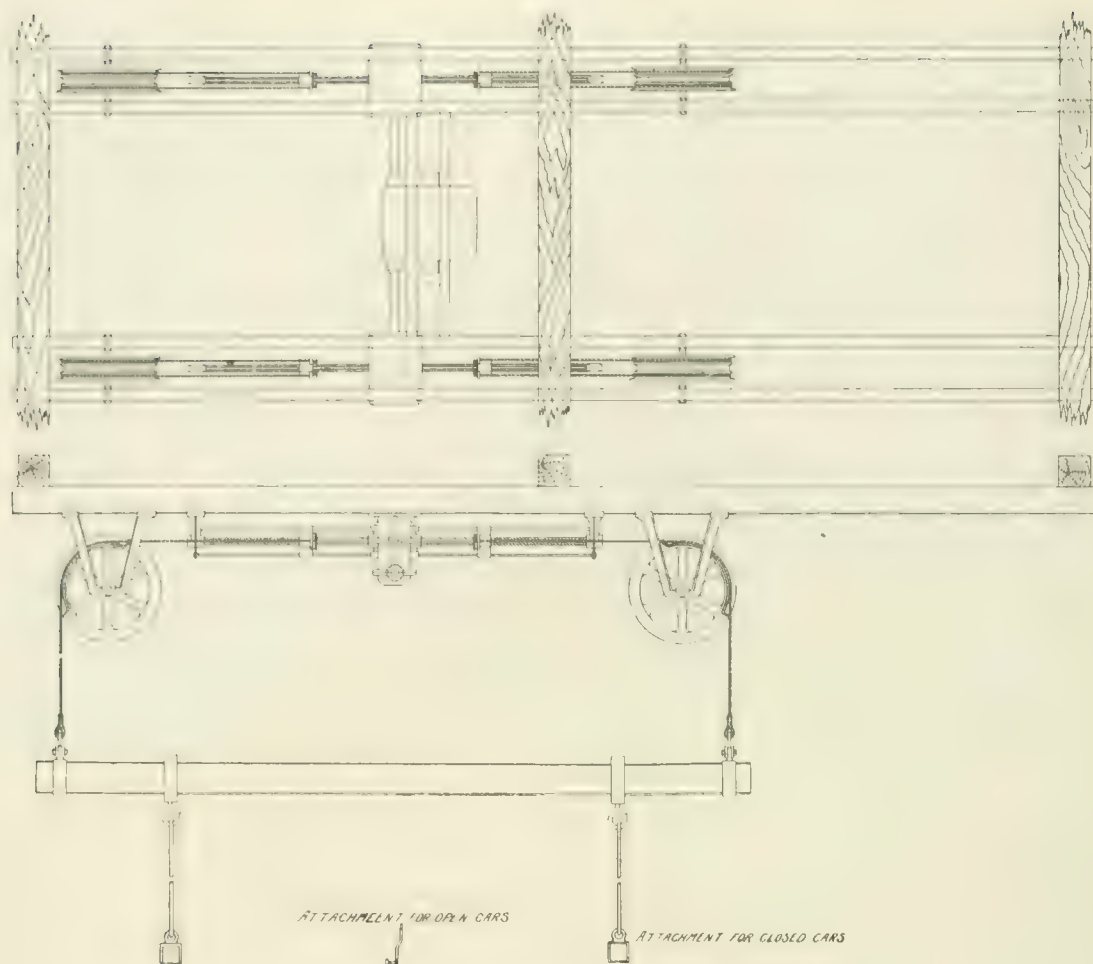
PLAN AND ELEVATION NEWARK HOIST.
